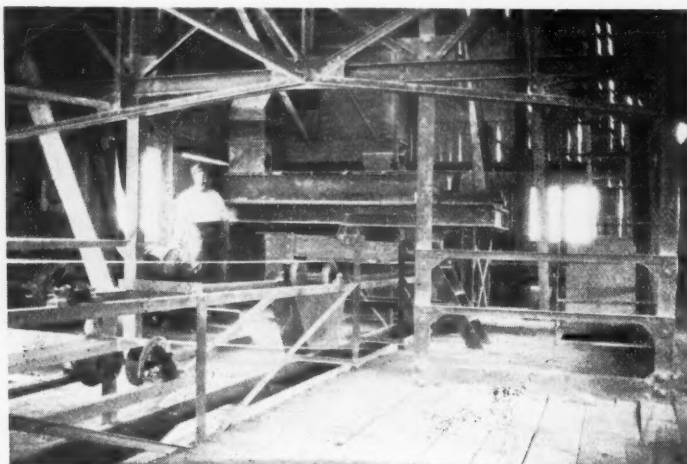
View of the hydrator and the steel belt conveyor by which the hydrated lime is removed
